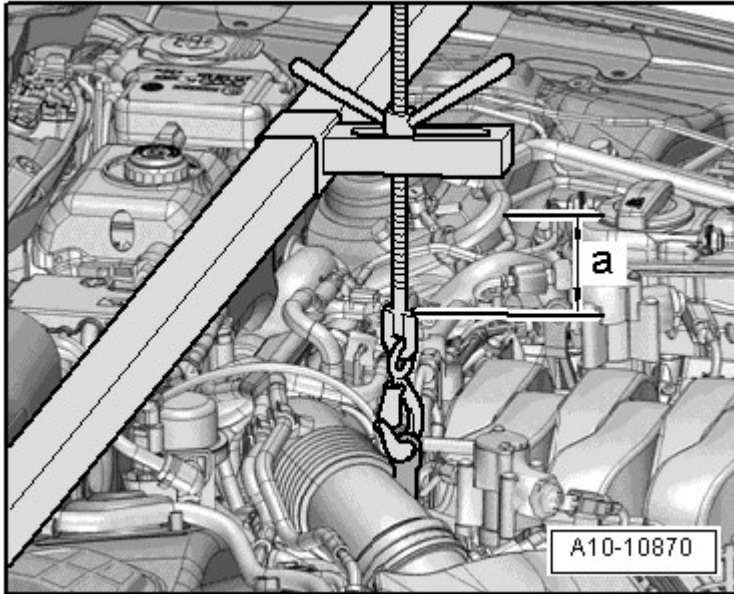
Raising Engine By Dimension Using Spindle 10 - 222 A /11
